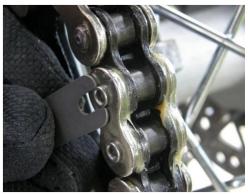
For proper installation of Rivet connecting links use assembly tool CZ VZR 6 and included measurement tool.
